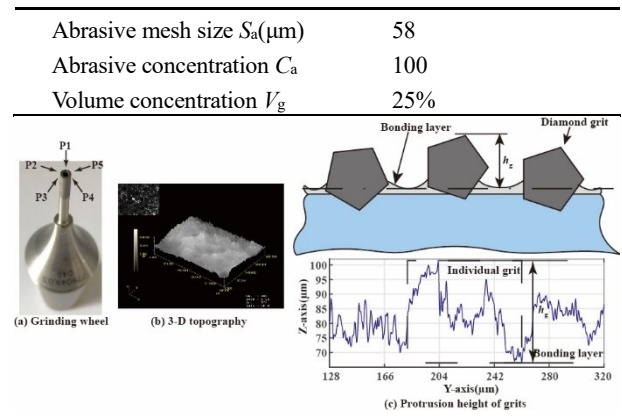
Illustrations of measuring process for grinding wheel end-face topology.
